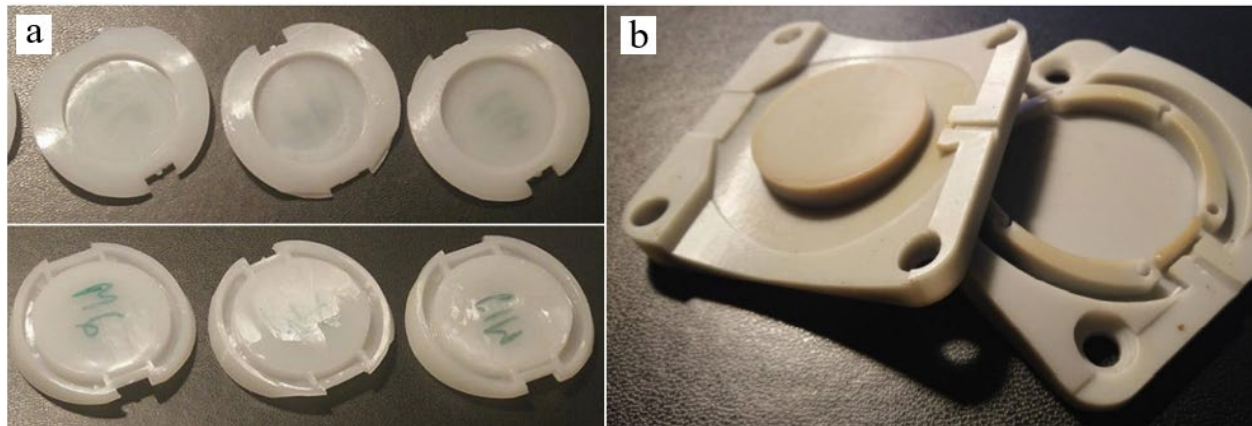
Molded cosmetic compact bases (left) and used SLA mold inserts vertically printed using Viper Si2 and Accua Extreme resin (right).
